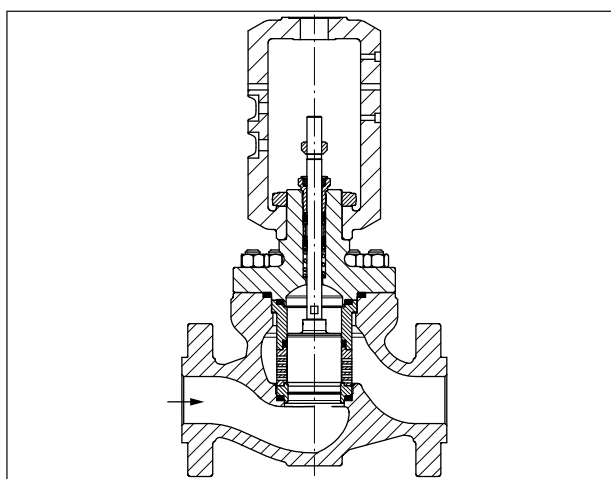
Type 251GR Globe Valve with screwed-in seat
